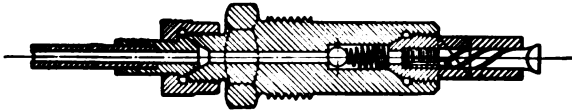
Spray Nozzle De La Vergne Two-cycle Oil Engine.
